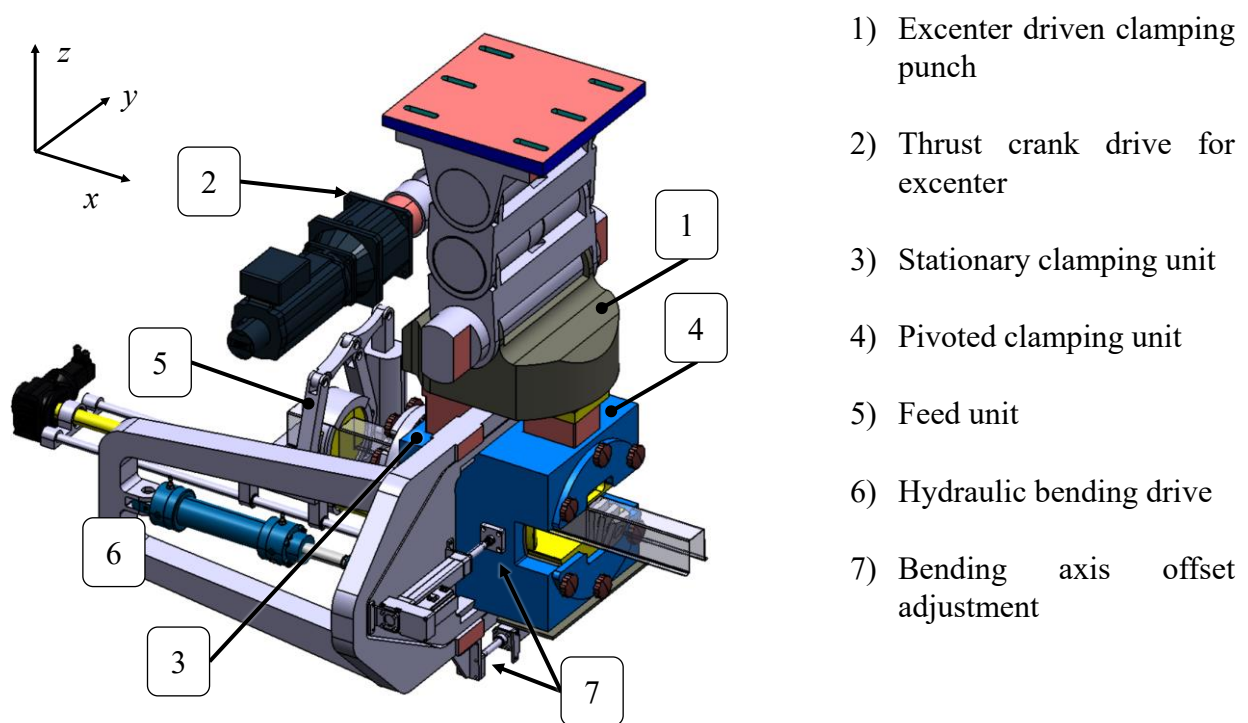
Specialized ISB machine concept (hidden machine frame) (Janzen 2019).
